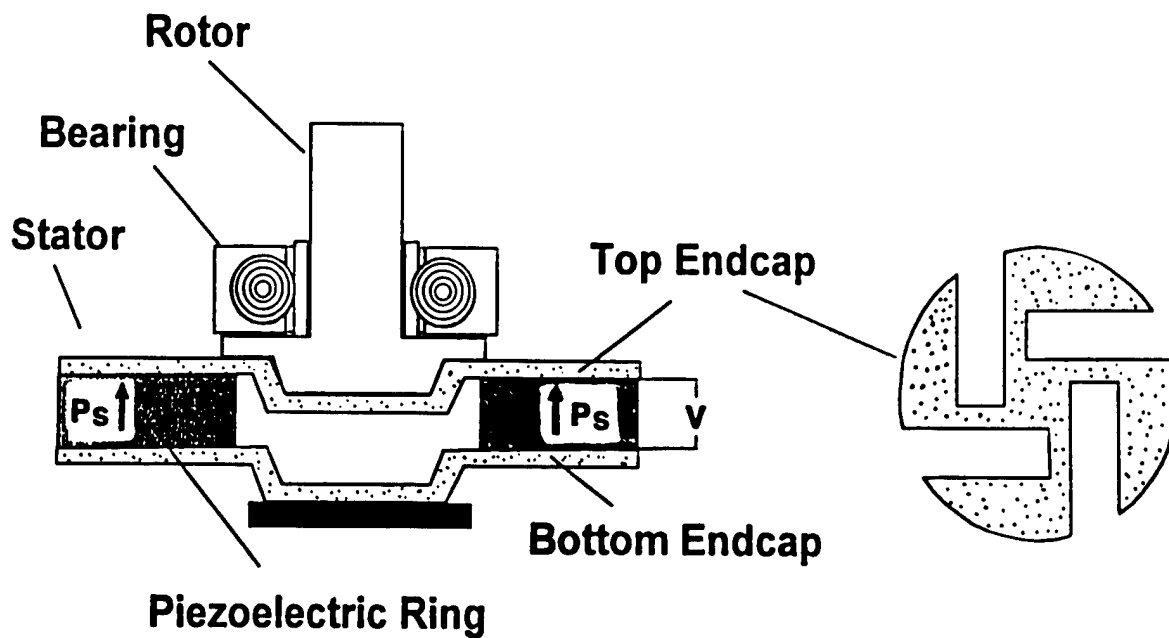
"Windmill" motor with a disk-shaped torsional coupler.
